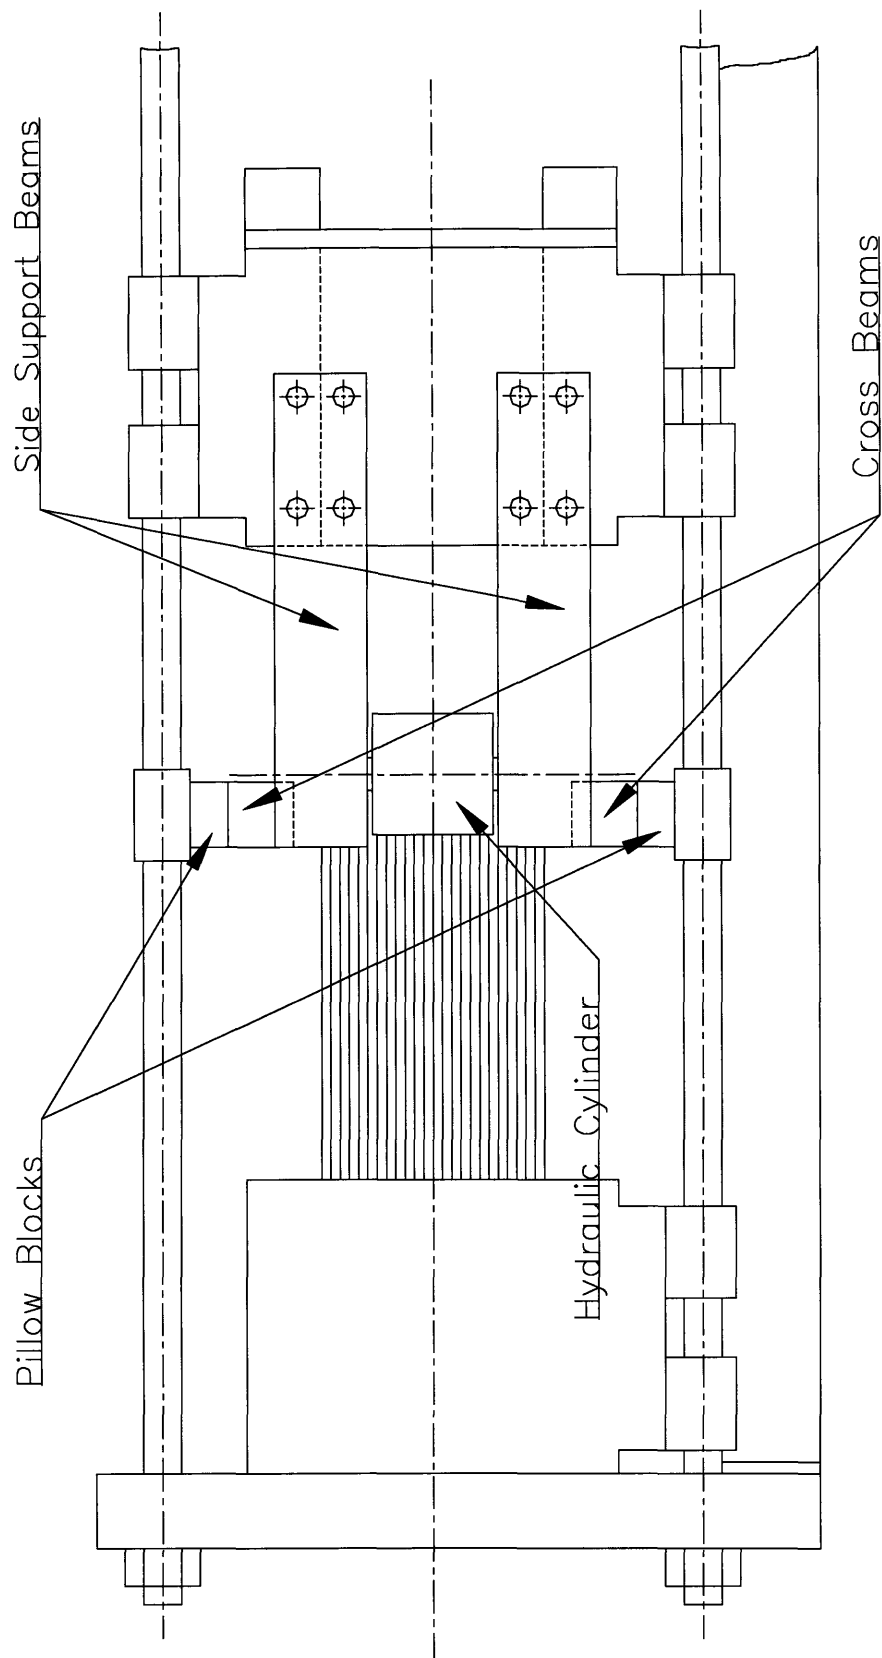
Side View of Machine Showing Support Structure Before Forming
